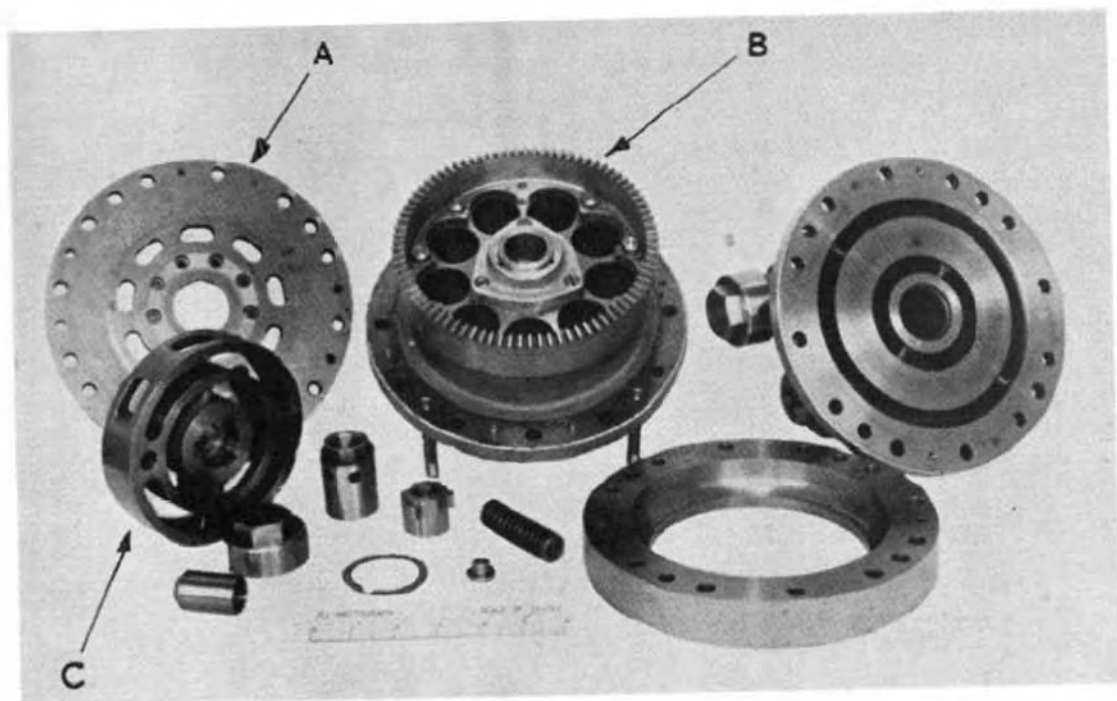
“ G ” TYPE MOTOR FOR A.R.L. POWER DRIVE
